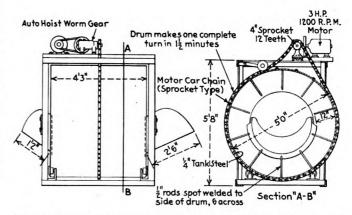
General arrangement and principal dimensions of the journal packing mixer
